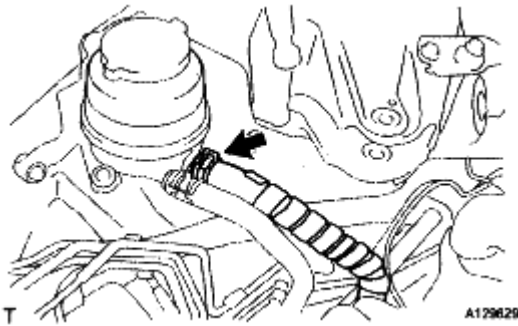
Locating No. 1 Oil Reservoir To Pump Hose
